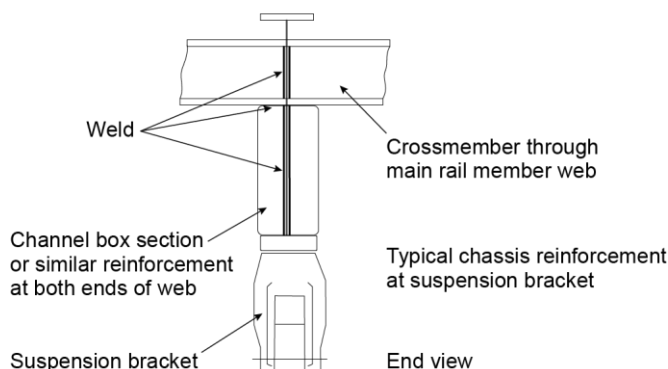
Example of typical chassis rail reinforcement at suspension bracket
